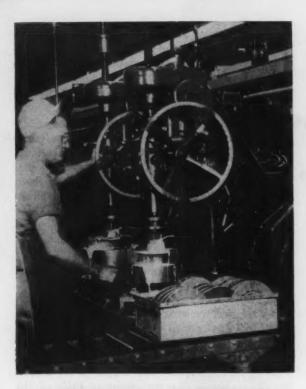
This two-spindle Barnes camelback drill is equipped with two chucks on the table for loading alternately. A core drill machines the cored hole in the hub, which is also faced and chamfered.
